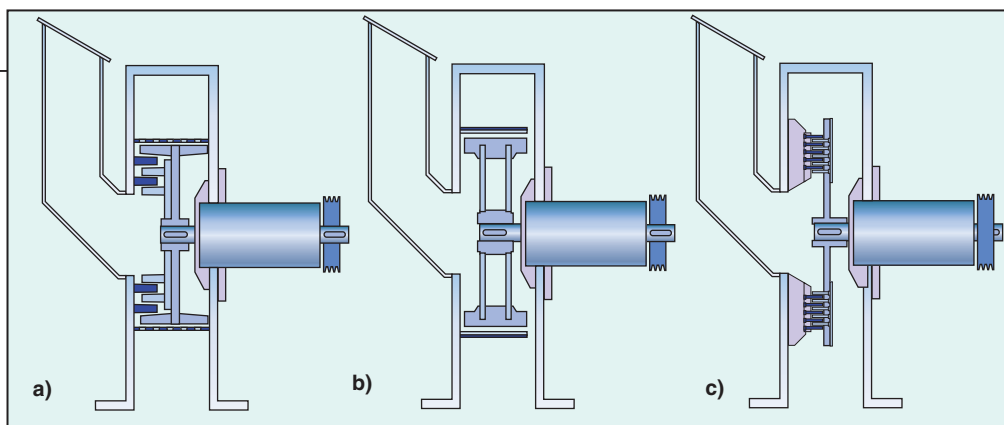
Simple rotor impact mills with crushing rotor and sieve (a), with plate beater unit and grinding track (b) and with pin discs (c)
